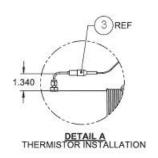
8/28 m sample cell panel assembly parts ( Continued)
